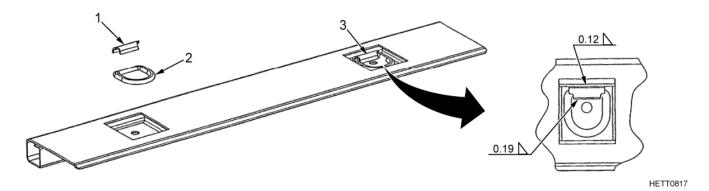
Welding D-Ring and D-Ring Retainer.
